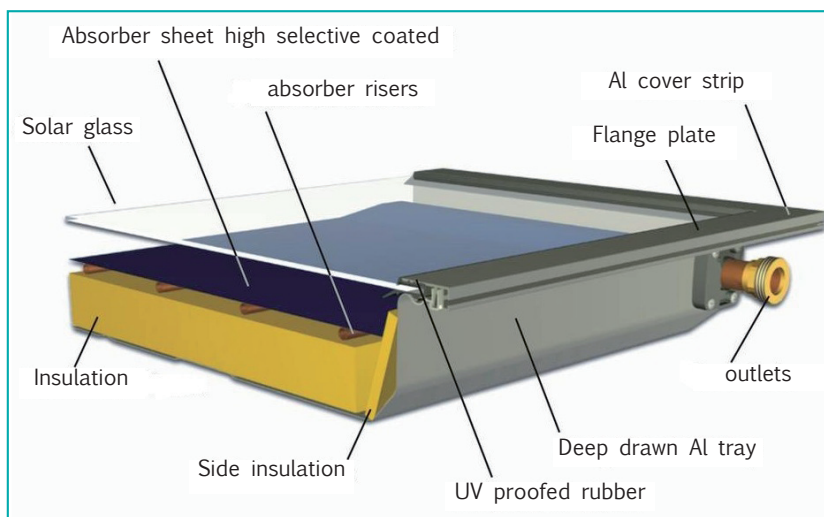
Exploded view of a flat plate collector. Source: GREENoneTEC
